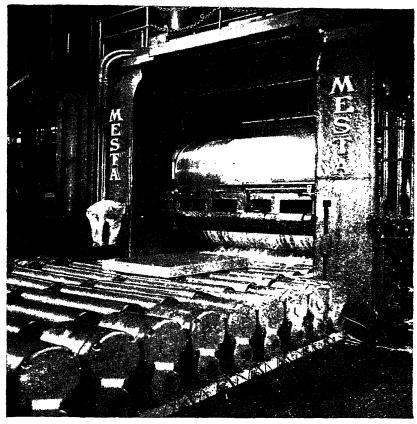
Breakdown mill which starts the process by which aluminum ingots are rolled into aluminum sheets for aircraft. (Courtesy of Aluminum Co. of America.)
